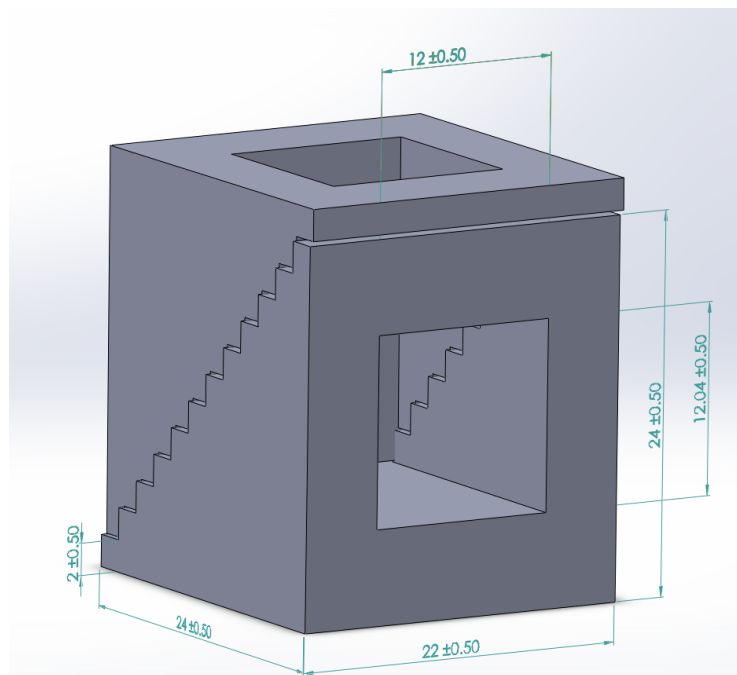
Model of the assembled staircase mold for mounting hair targets.
